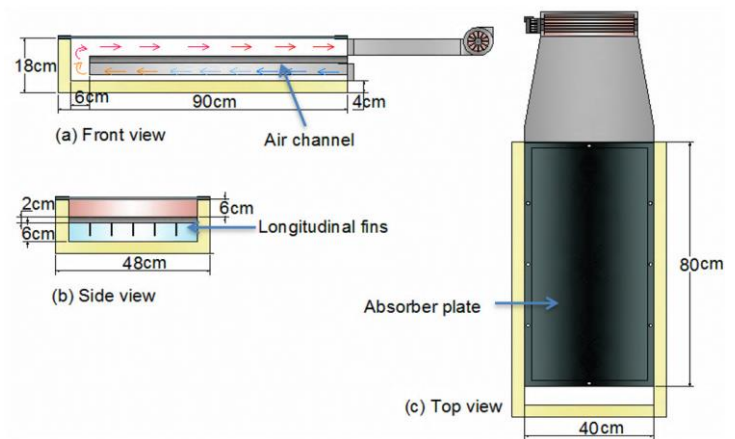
Dimensions of SAH: (a) air channel, (b) absorber plate.
